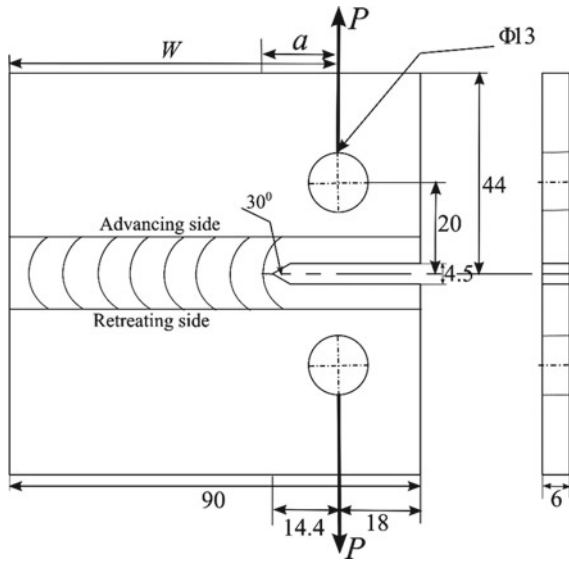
Schematic of the CT test specimen (all dimensions are in mm)
